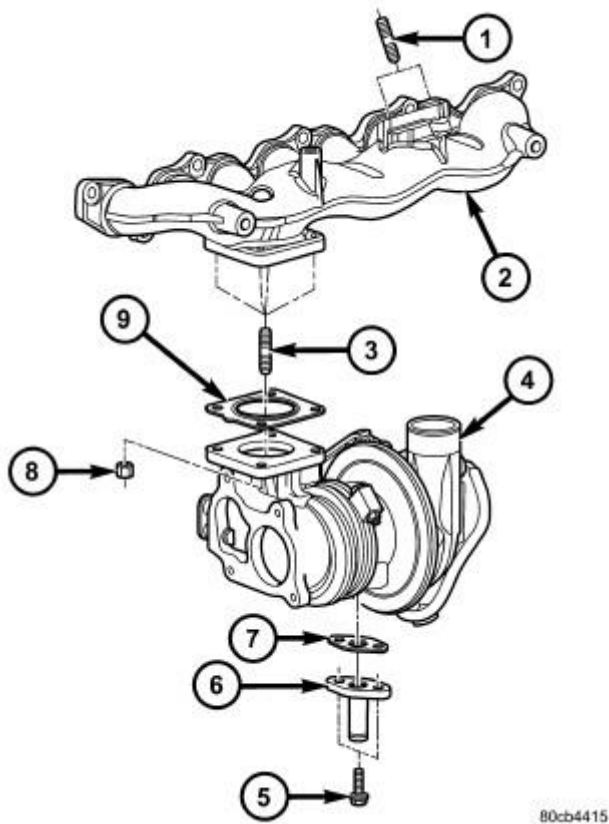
EXHAUST MANIFOLD AND TURBOCHARGER ASSEMBLY
